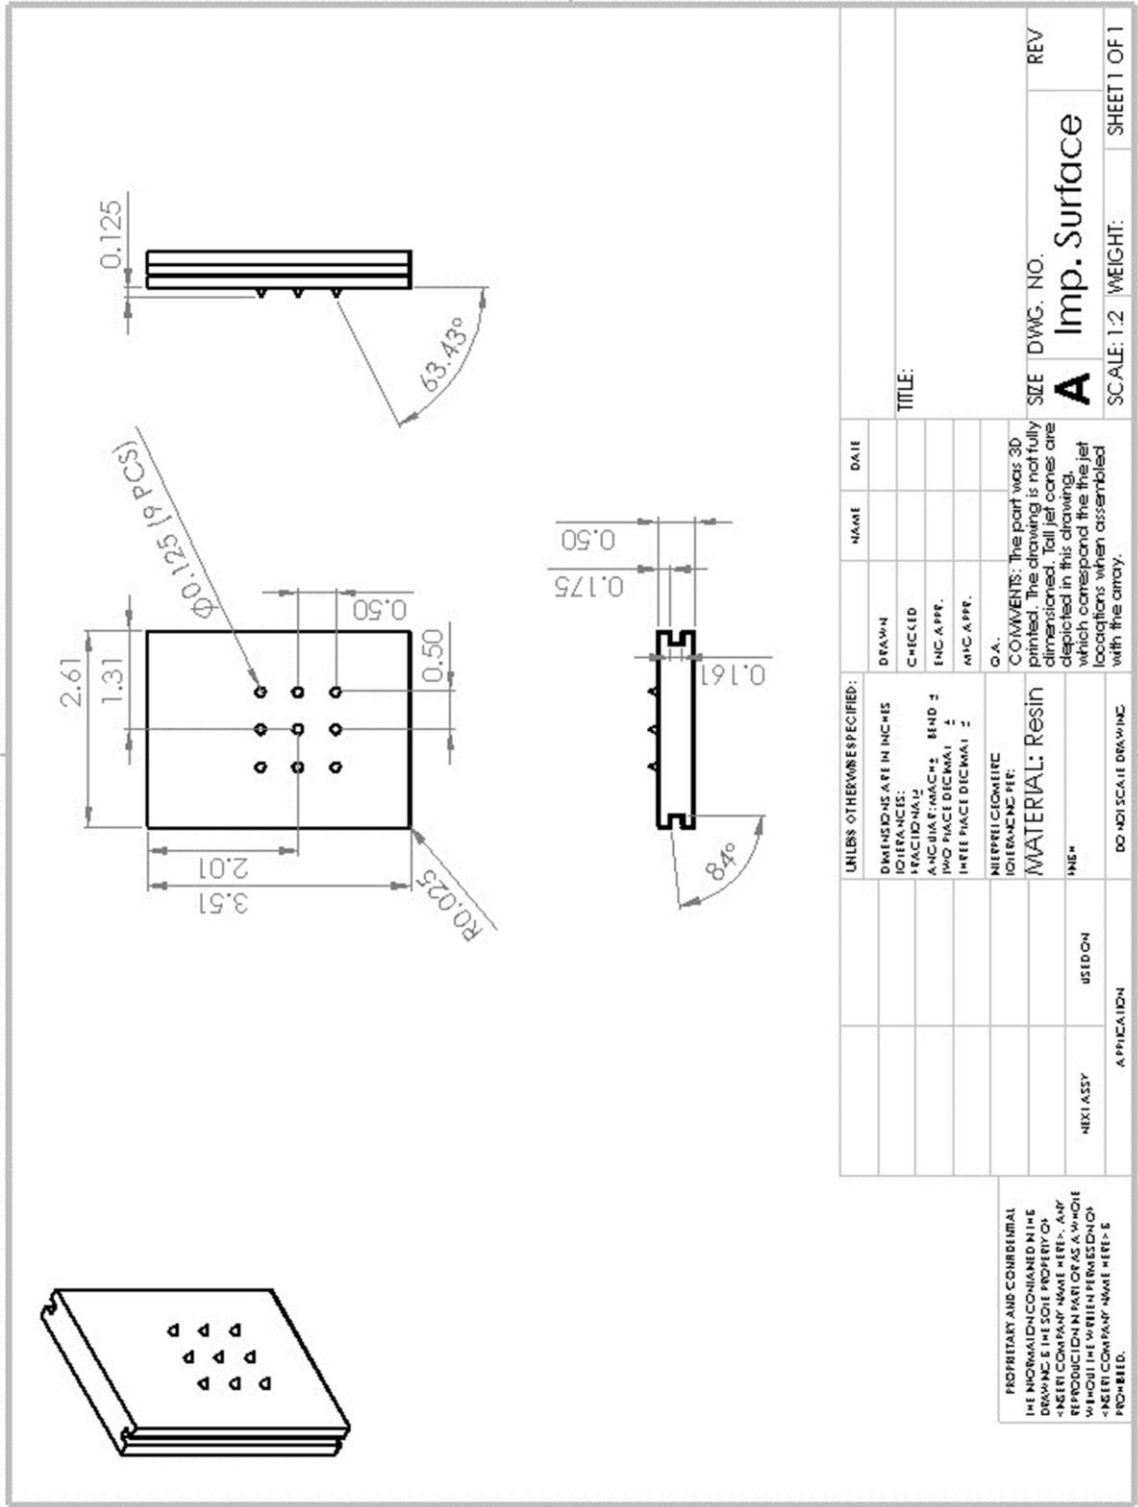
Modular impingement surface with tall jet cones mechanical drawing
